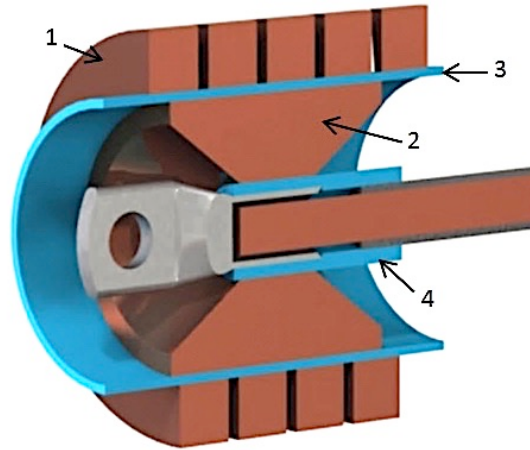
3D model of the EMPC tool and its main components: 1. Primary coil; 2. Fieldshaper; 3. Electrical insulator; 4. Electrical insulator.
